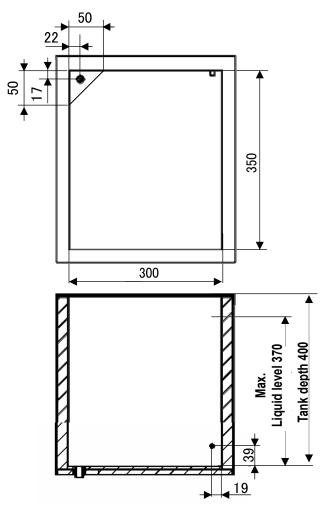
Bath dimensions (INR-244-748/-749)
